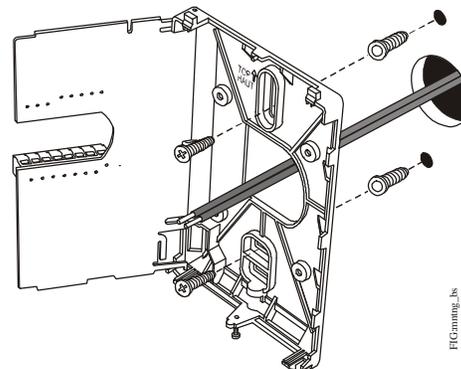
Securing the Thermostat Controller Mounting Base to the Wall
